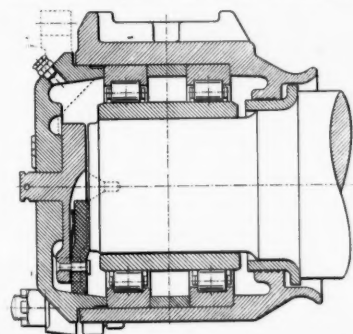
Truck axlebox with parallel roller bearings, Hoffmann
